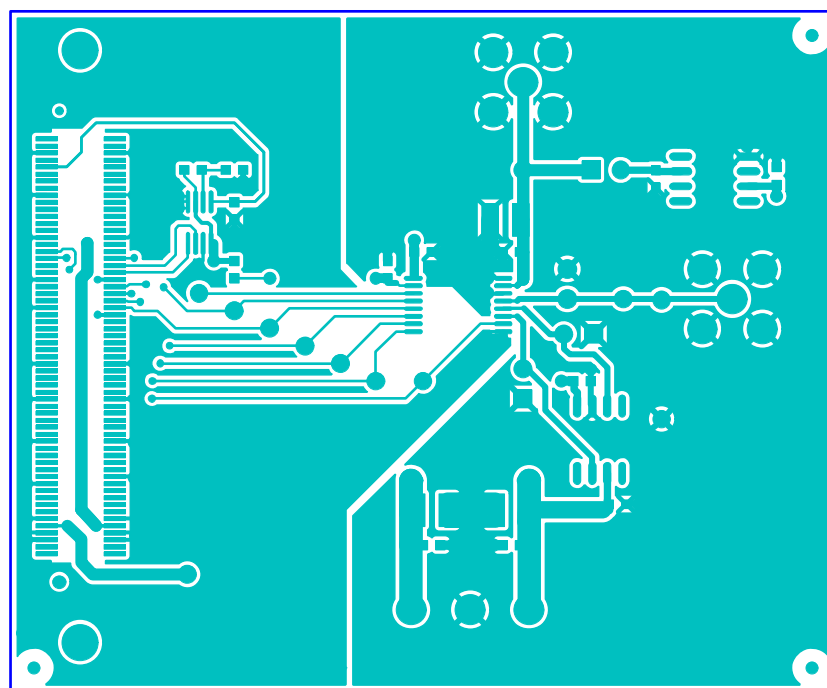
Top Printed Circuit Board (PCB) Layer Schematic
